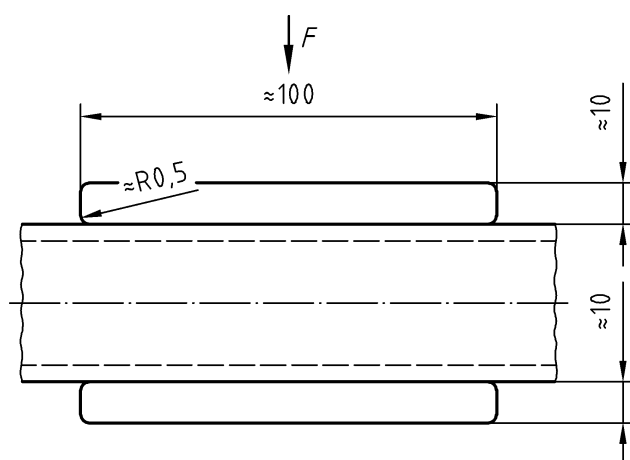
Arrangement for testing collapse of compressed air supply tube
